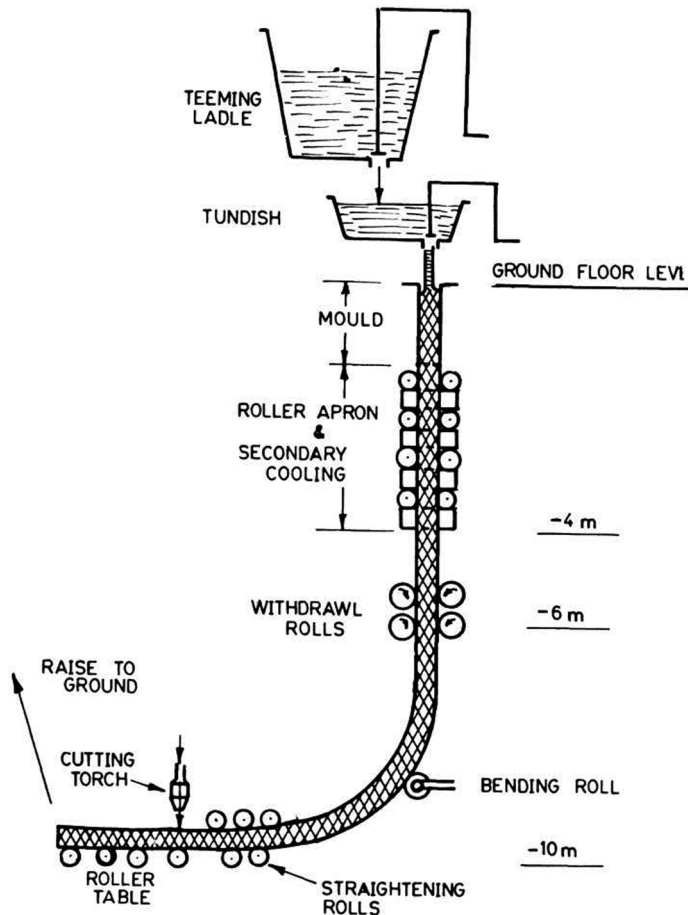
Vertical-mold-bend-discharge type continuous casting machine.
